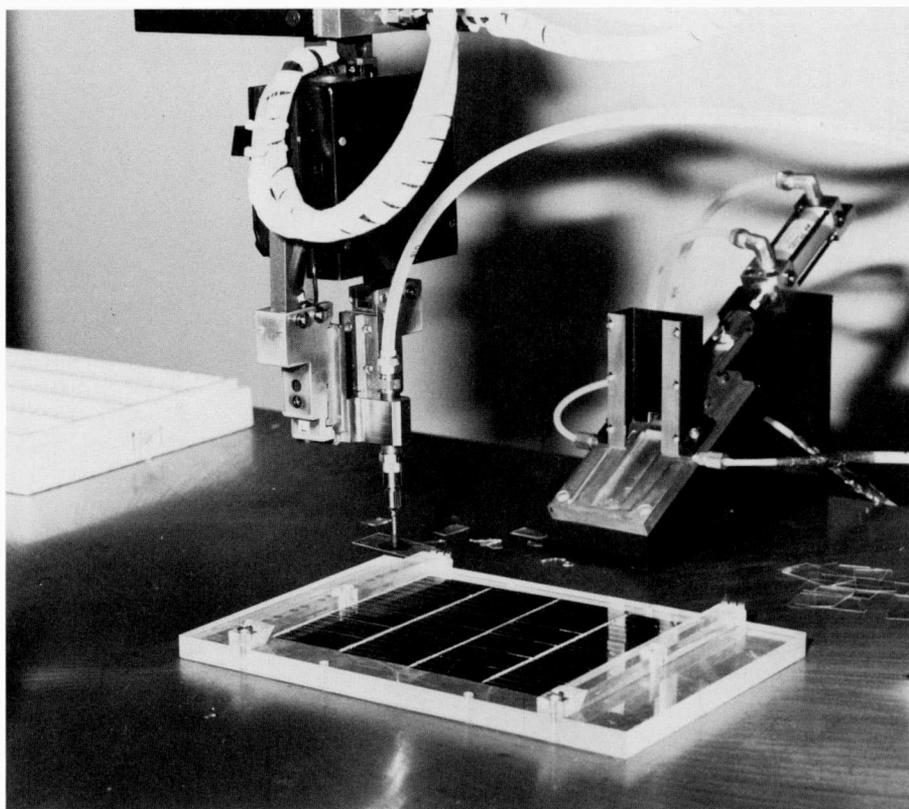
The manipulator placing filter glass on a solar cell, using the vacuum pickup tool.
